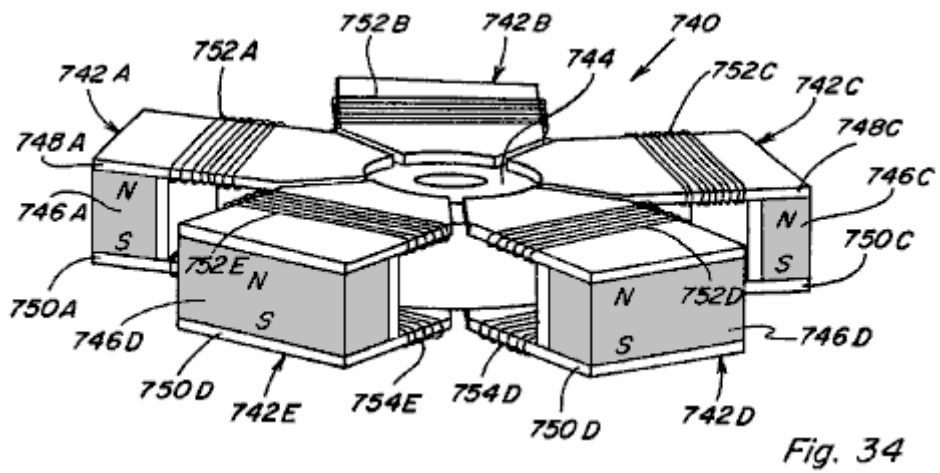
is a perspective view of another embodiment of a rotary motion device;
